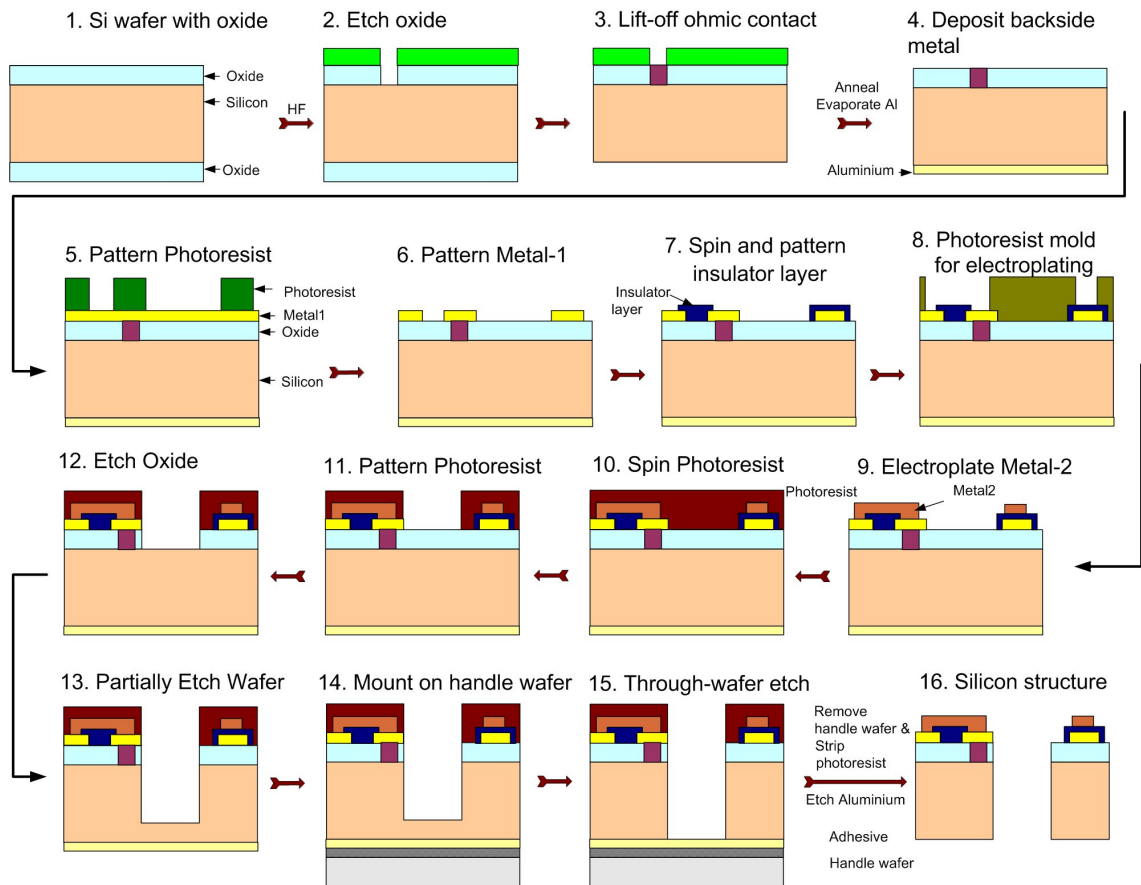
Process schematic for the complete suspension fabrication with metal and insulator layers.
